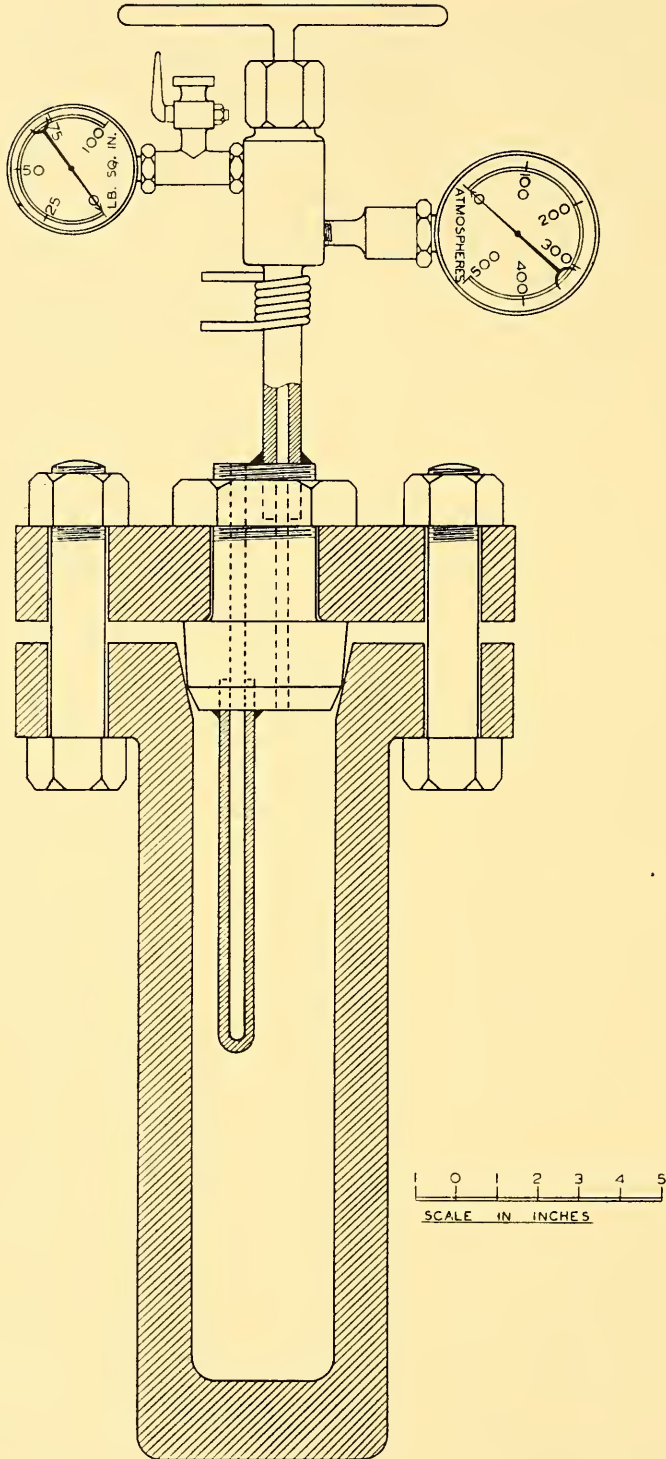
Section of high-pressure vessel used for solvent extraction of torbanite.
